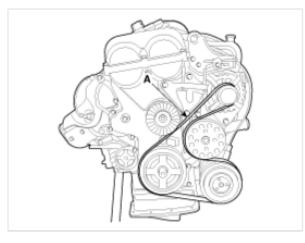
Identifying Alternator Tension Adjusting Bolt Courtesy of HYUNDAI MOTOR AMERICA
